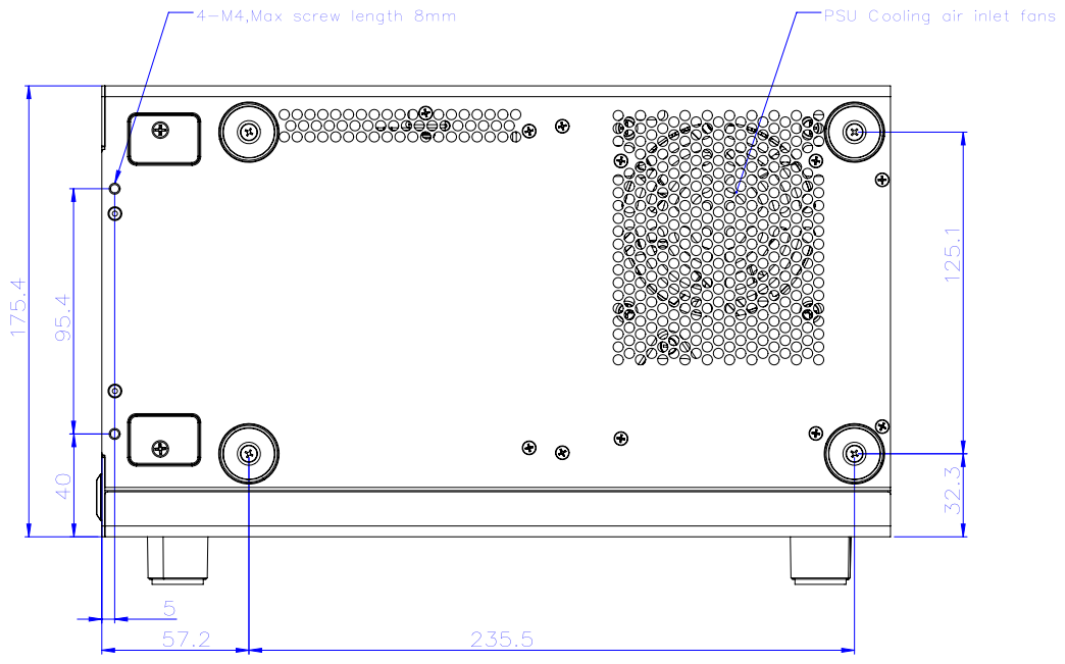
Right Side View (PXle-2519 Gen 3/Gen 2)
